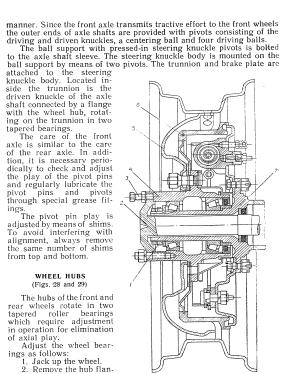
Rear Wheel Hub 1 — Bearing adjusting nut, 2 — axle shaft flange,
